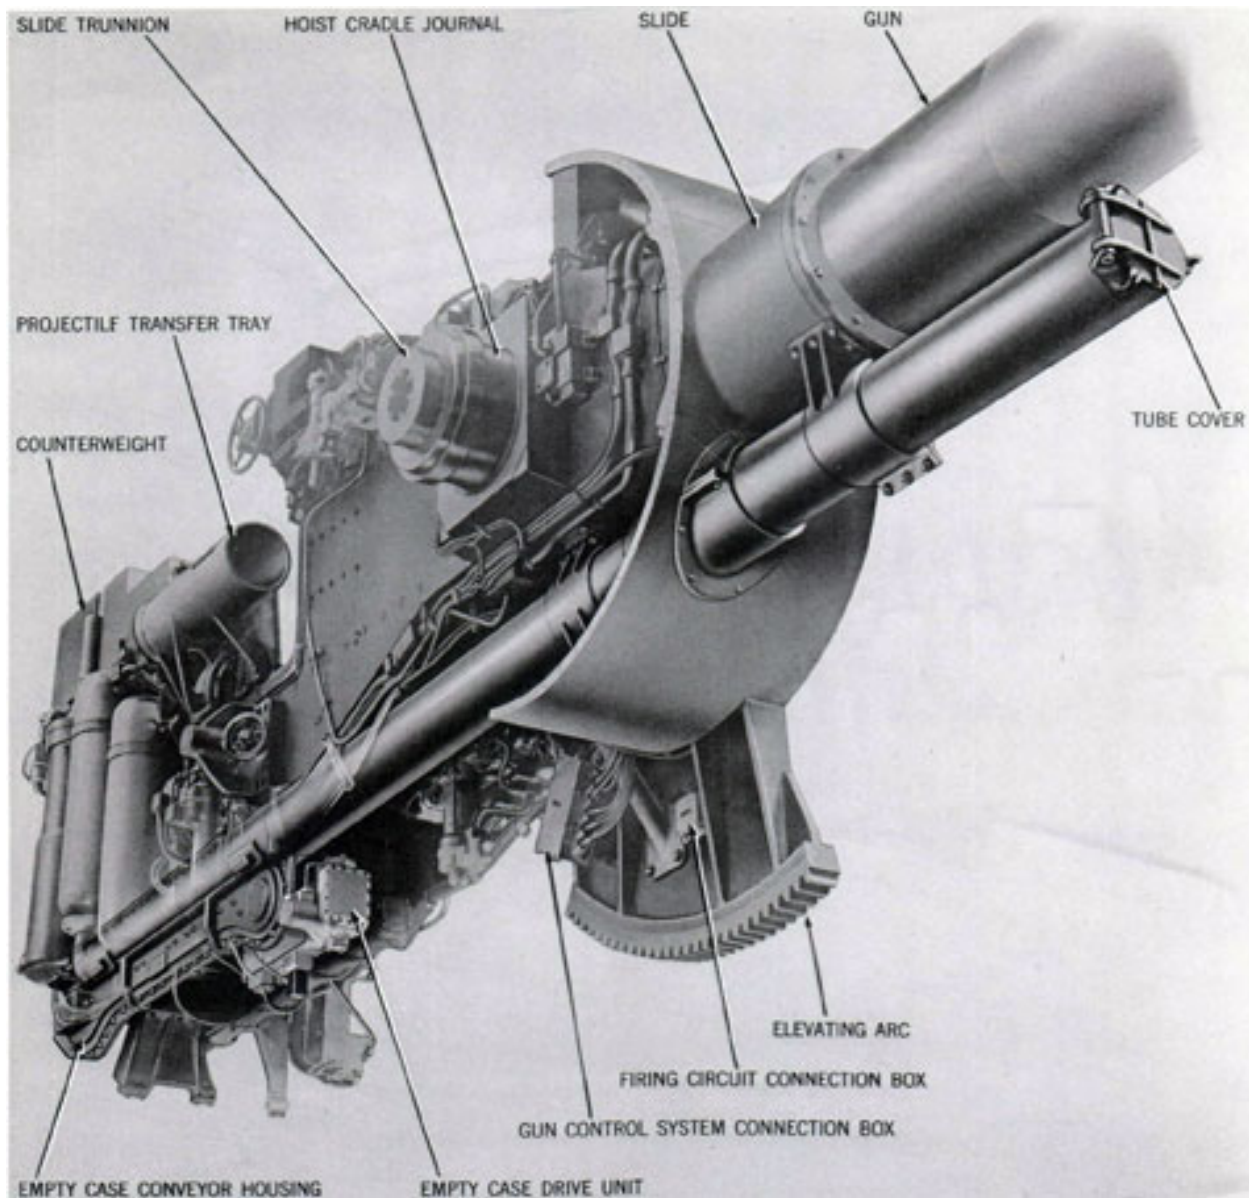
Gun and Slide Equipment. General Arrangement Bottom View
